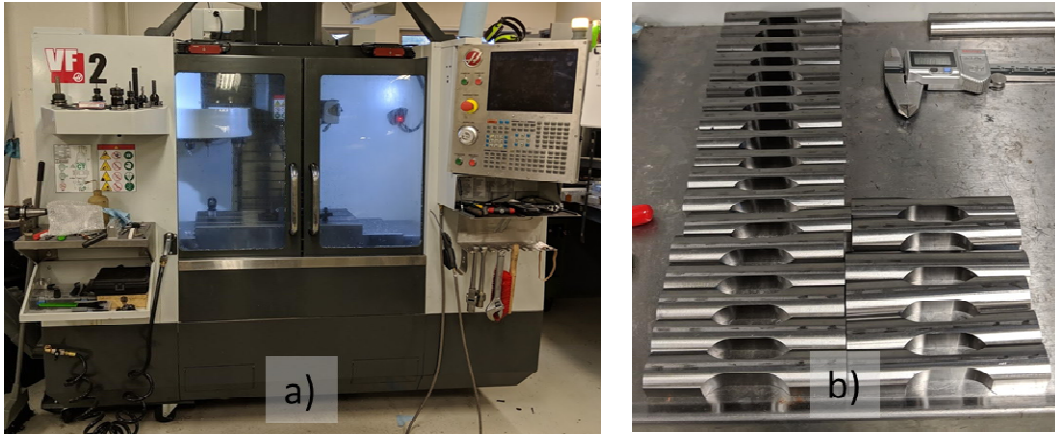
(a) The CNC machine, (b) Specimens after being cut
